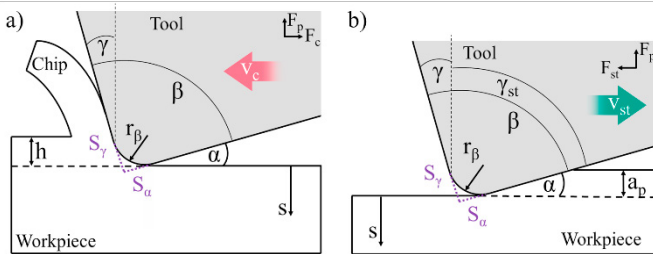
Complementary Machining strategy [14]. Regular cutting a) followed by Complementary Machining b) without chip formation and reversed tool.
